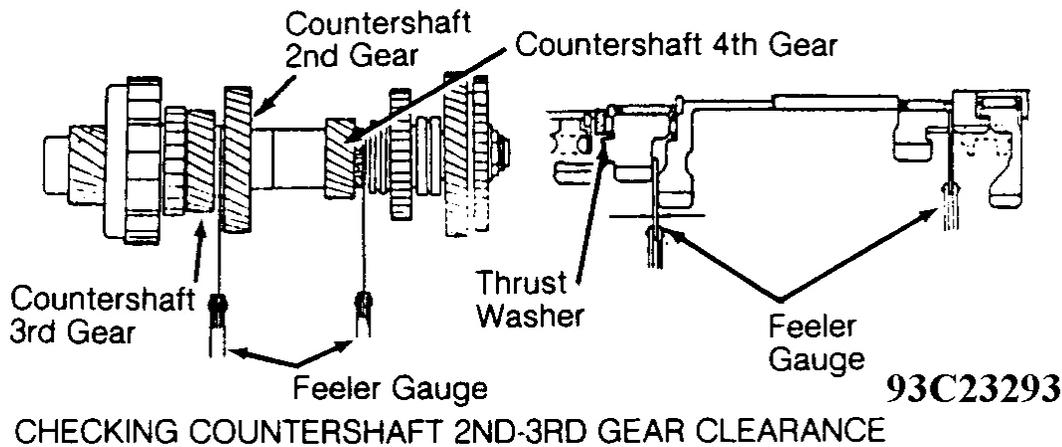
Countershaft 2nd-3rd Gear & 4th Gear Clearances (2 of 2)
